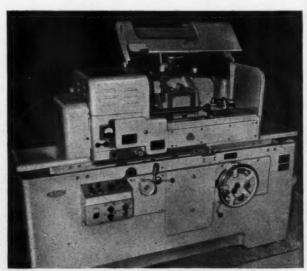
Built by the Moscow jig boring machine factory, the type 5822 universal thread grinder can be employed for operations on gauges, screws and worms, flat and circular thread chasers, racks, and form tools, also for form relief grinding taps, hobs, and thread-milling cutters
